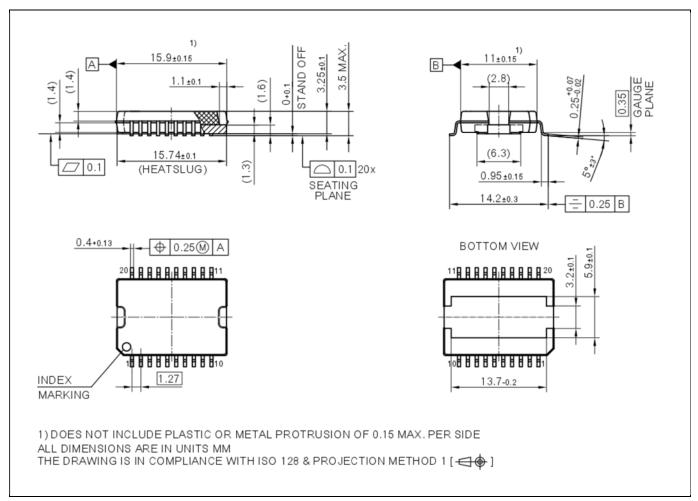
PG-DSO-20-85 Package Outline, dimensions (mm)
